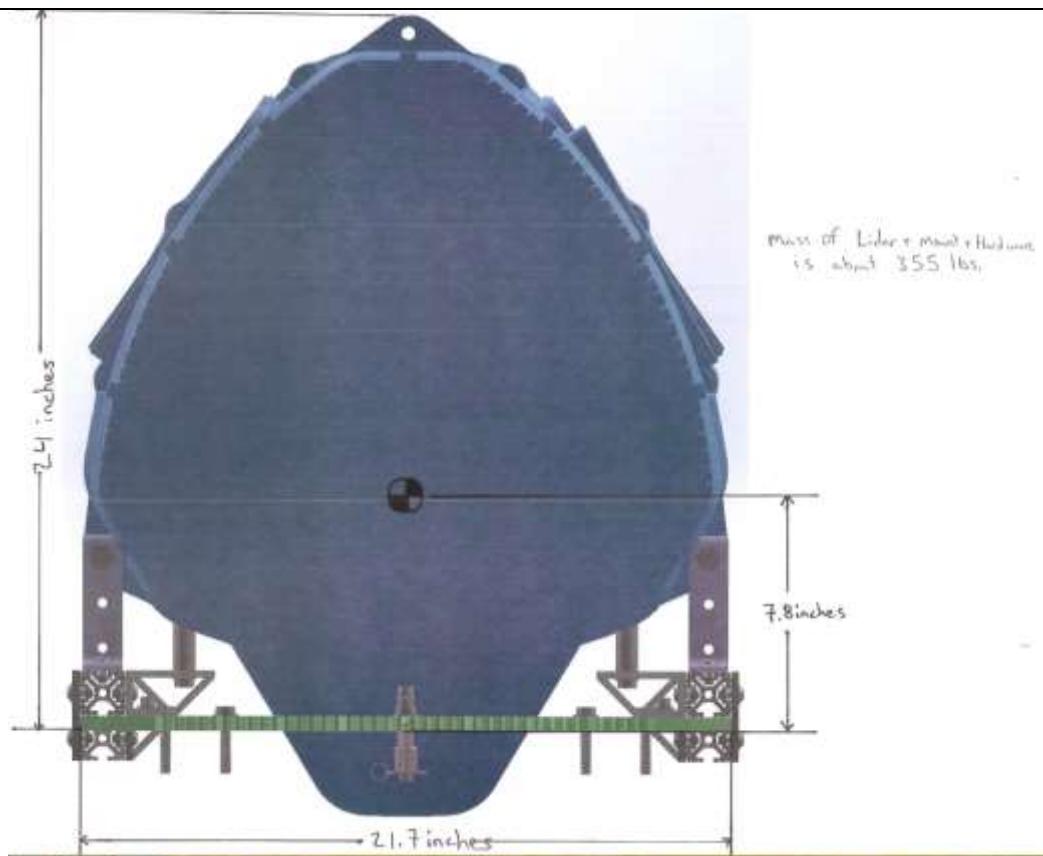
Back view of lidar and lidar mounting plate with connecting hardware.
